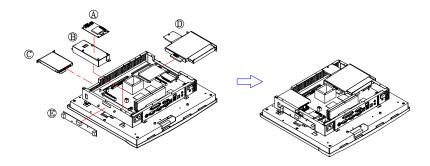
PERIPHERAL MODULE ASSEMBLY
